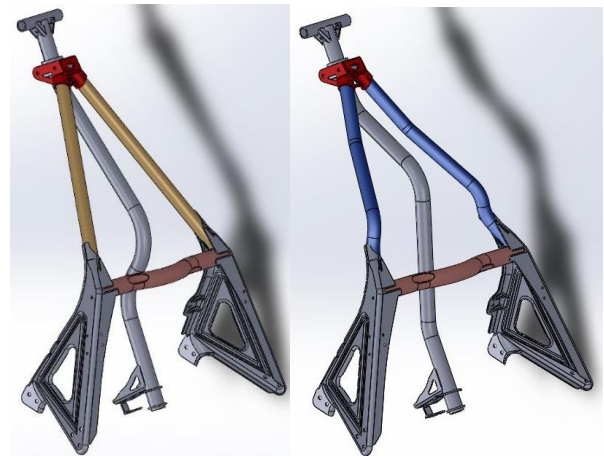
OEM Steering Shaft and S-Module vs New Parts
